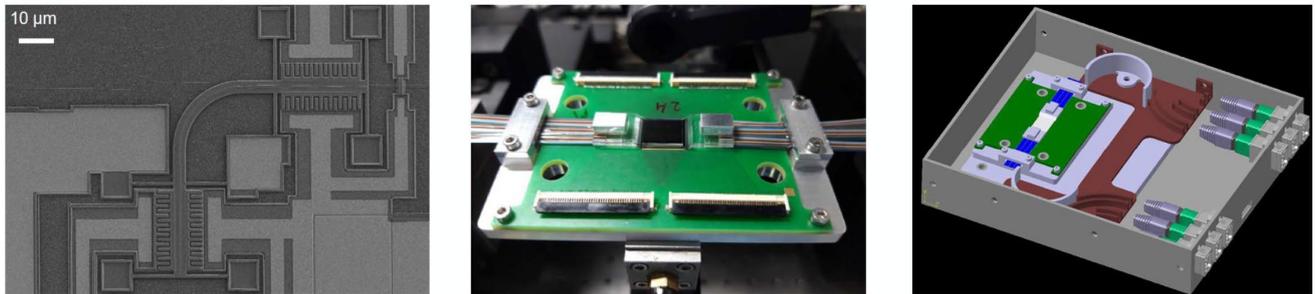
EPFL optical switch, silicon design, packaged PIC and equipment design.
